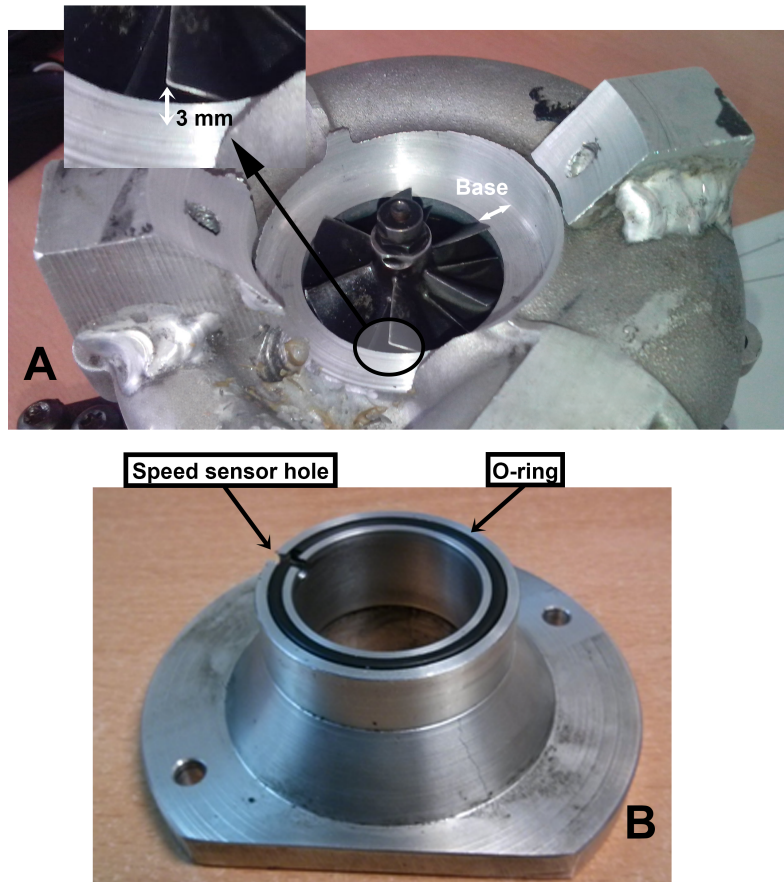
A) Modified compressor housing, B) Coupling piece.
